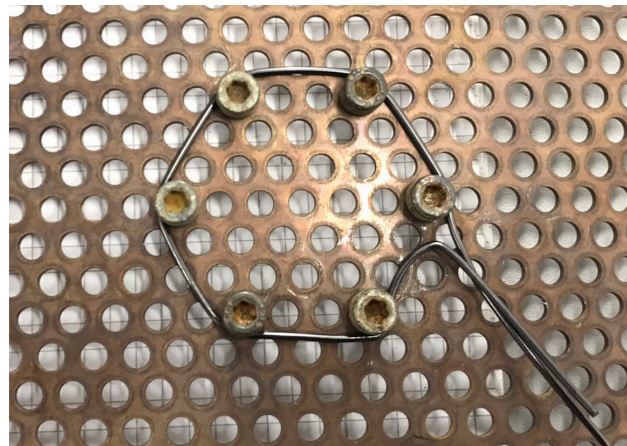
FASTENING AN SMA WIRE ONTO A PERFORATED METAL SHEET WITH BOLTS AND NUTS TO PREVENT THE WIRE FROM MOVING DURING ANNEALING PROCESS
